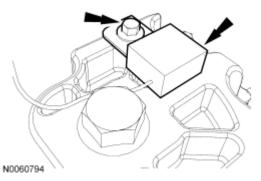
Locating Radio Frequency Interference Capacitor Bolt Courtesy of FORD MOTOR CO.
